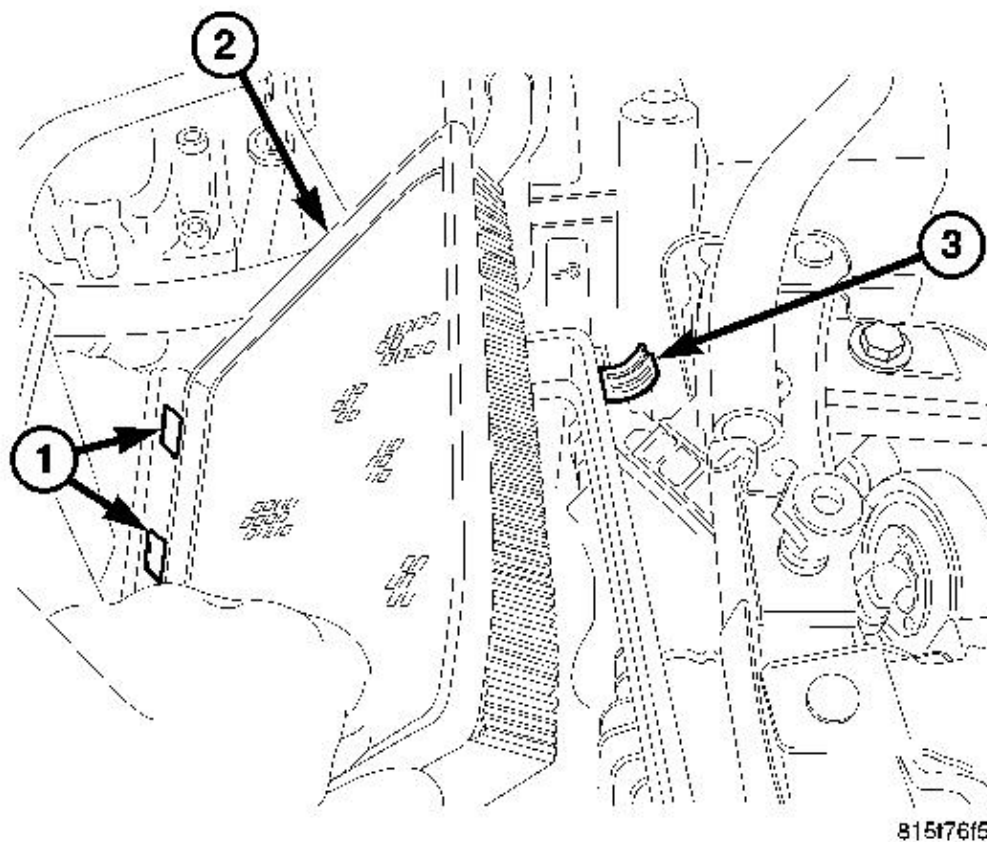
Air Cleaner Element, Locating Tabs & Spring Clip
